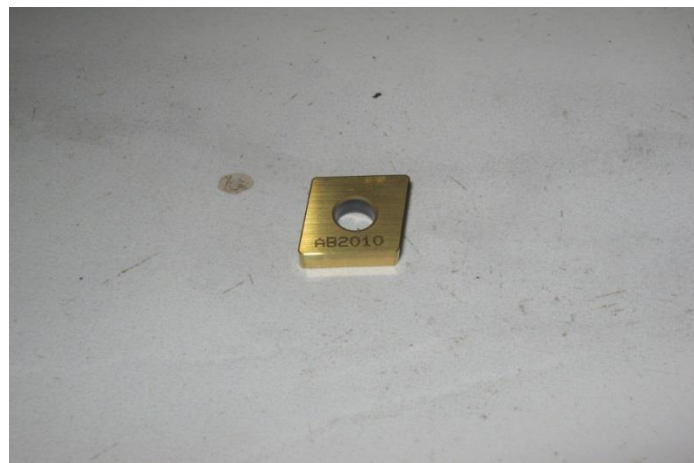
CVD Multilayer coated carbide insert (CNMG120408).
